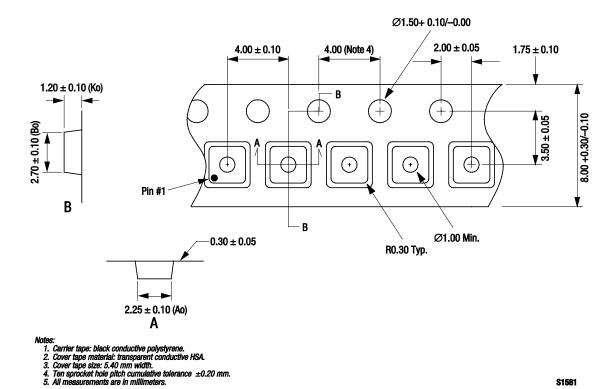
SKY13270-92LF Tape and Reel Dimensions
